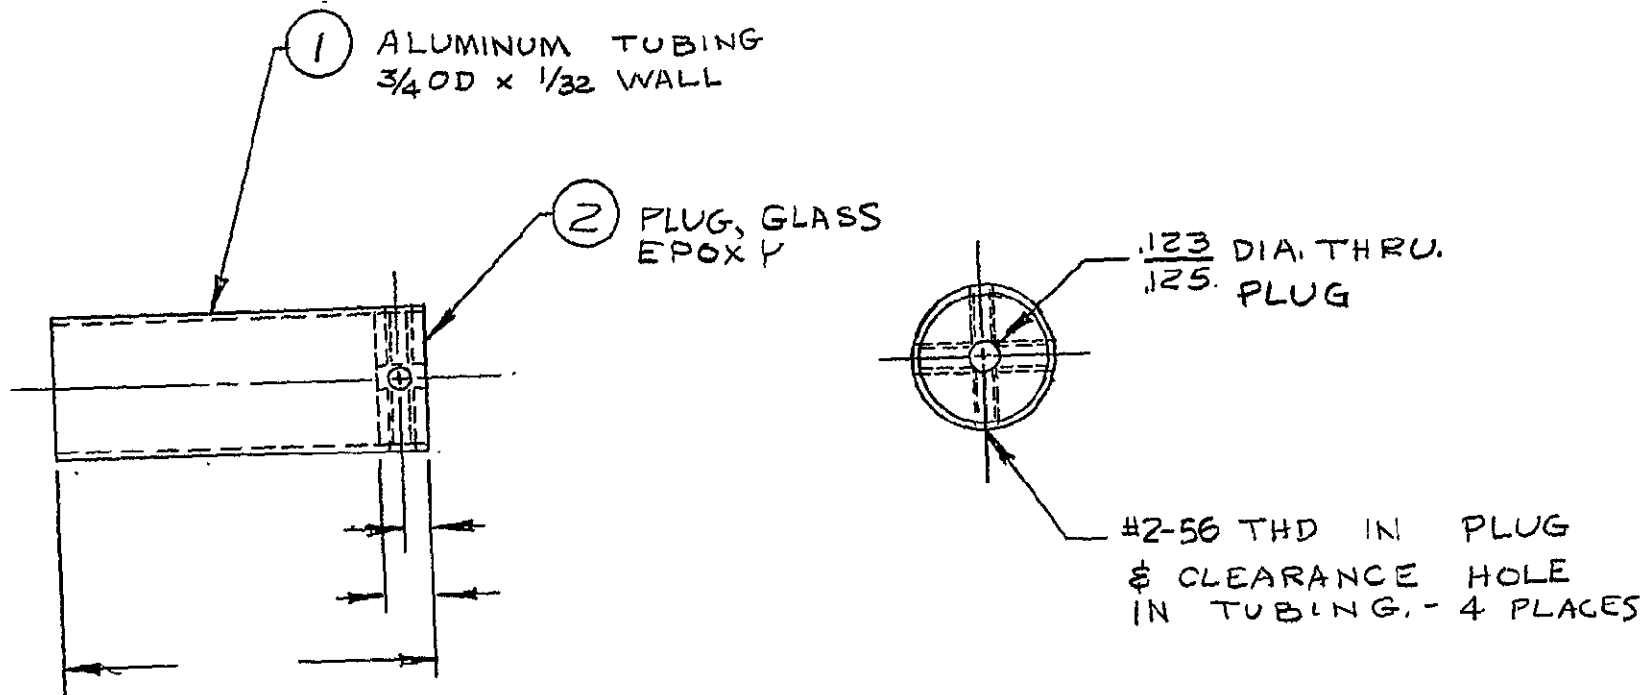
Tube, Support - 45 Degree LA Cooler · 8113993
